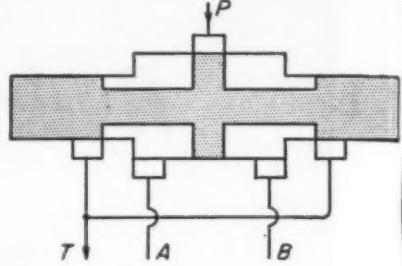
High-accuracy hydraulic valve with trigger firing action
